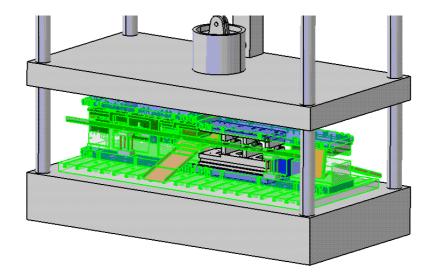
DMU kinematic-simulation of a sheet metal forming press and corresponding transfer equipment, visualized by CATIA V5 [SchMe06]
